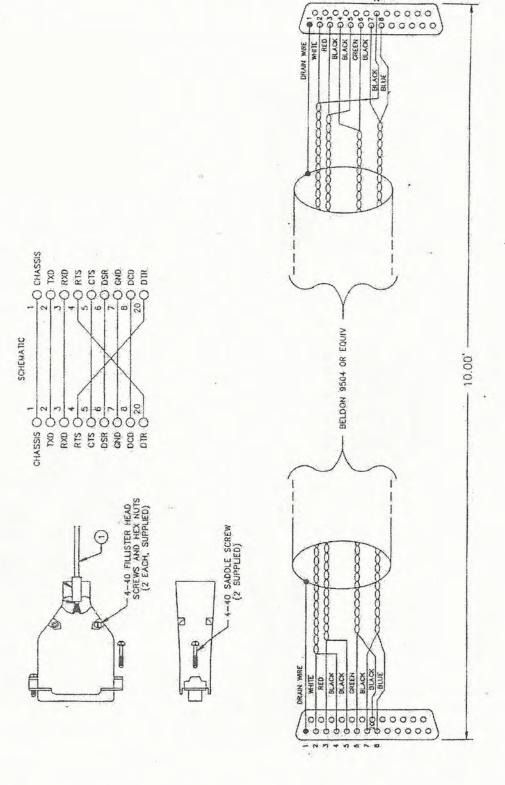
9F-25M Modem Cable Norm Assembly 24C1167 Rev A
